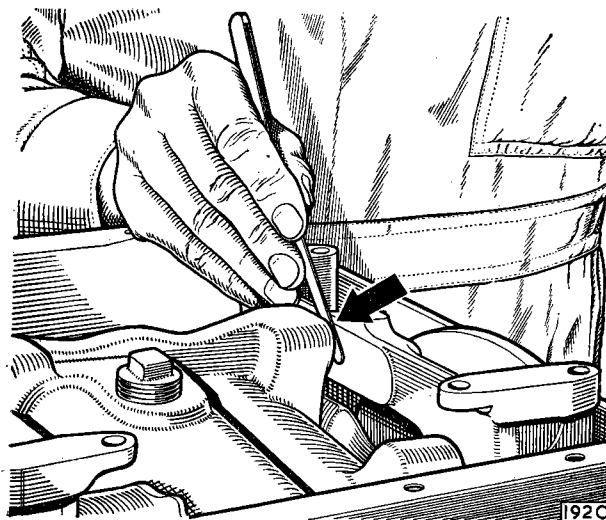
Measuring the clearance between the inner fulcrum mounting bracket and the differential casing
